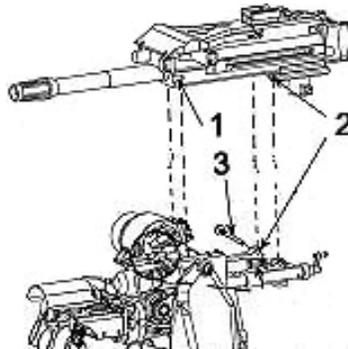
MK19 Cocking Bracket Releaser Position.
